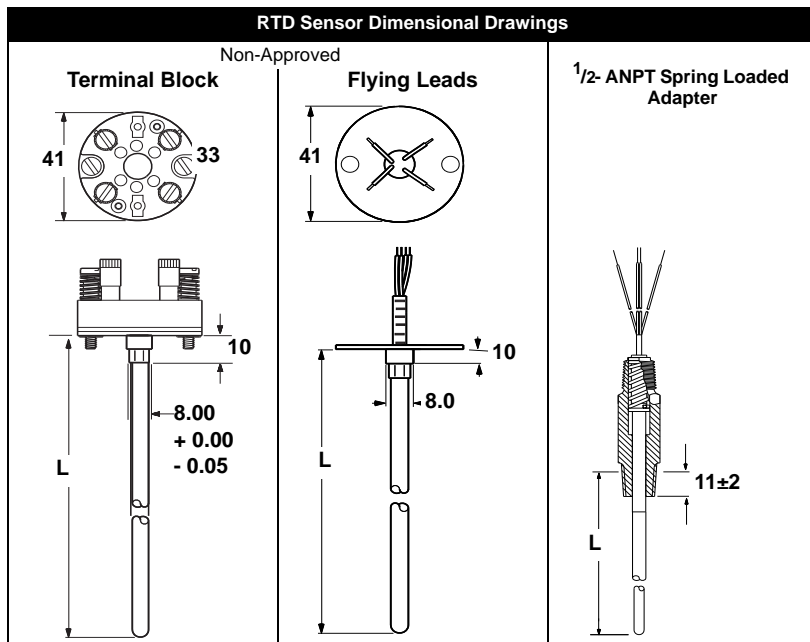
Sensor Assembly with DIN Style Measuring Insert Suitable for Use with Terminal Block or Head Mount Transmitter
